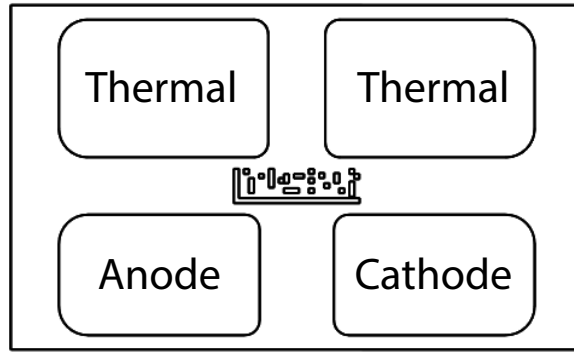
Recommended PCB solder pad layout for LUXEON Altilon SMD.
